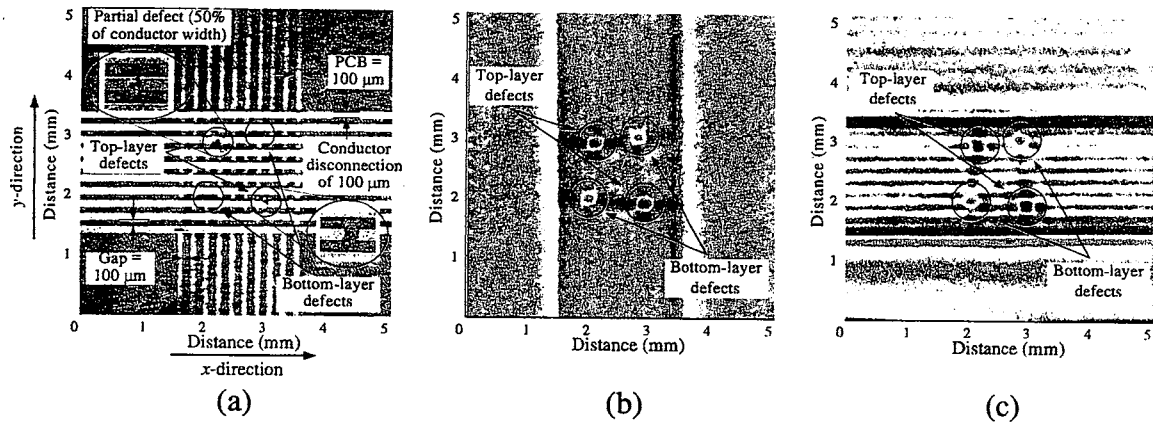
Single layer PCB model (area of  $5 \text{ mm} \times 5 \text{ mm}$ ) inspection example
